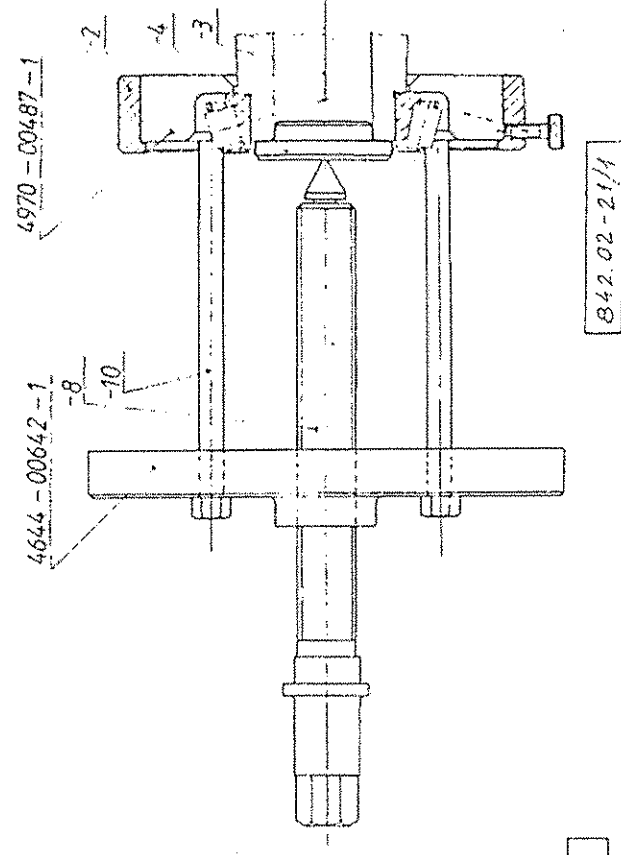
PULLING OFF THE TAPER ROLLER BEARING CONES
